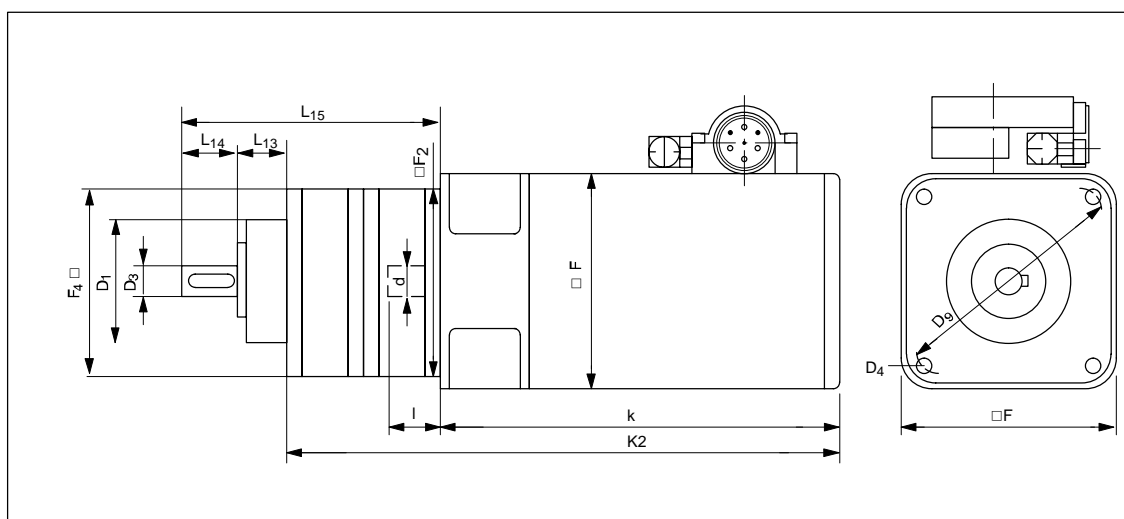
1FT5 motor with planetary gearbox (alpha Company) SPG 2 stage – dimensions in [mm]
